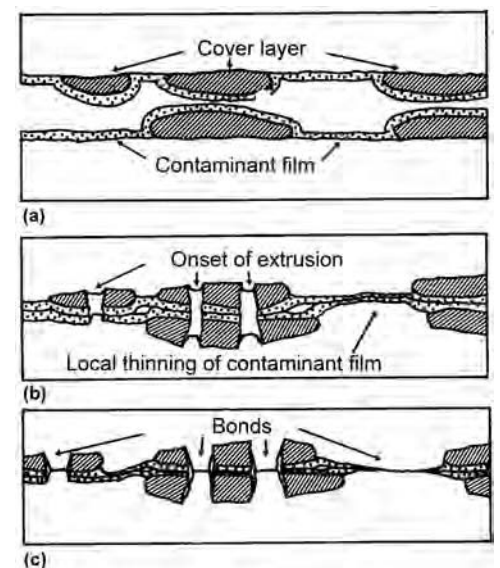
Refined model for bonding mechanisms in cold welding. Source: Ref 8
